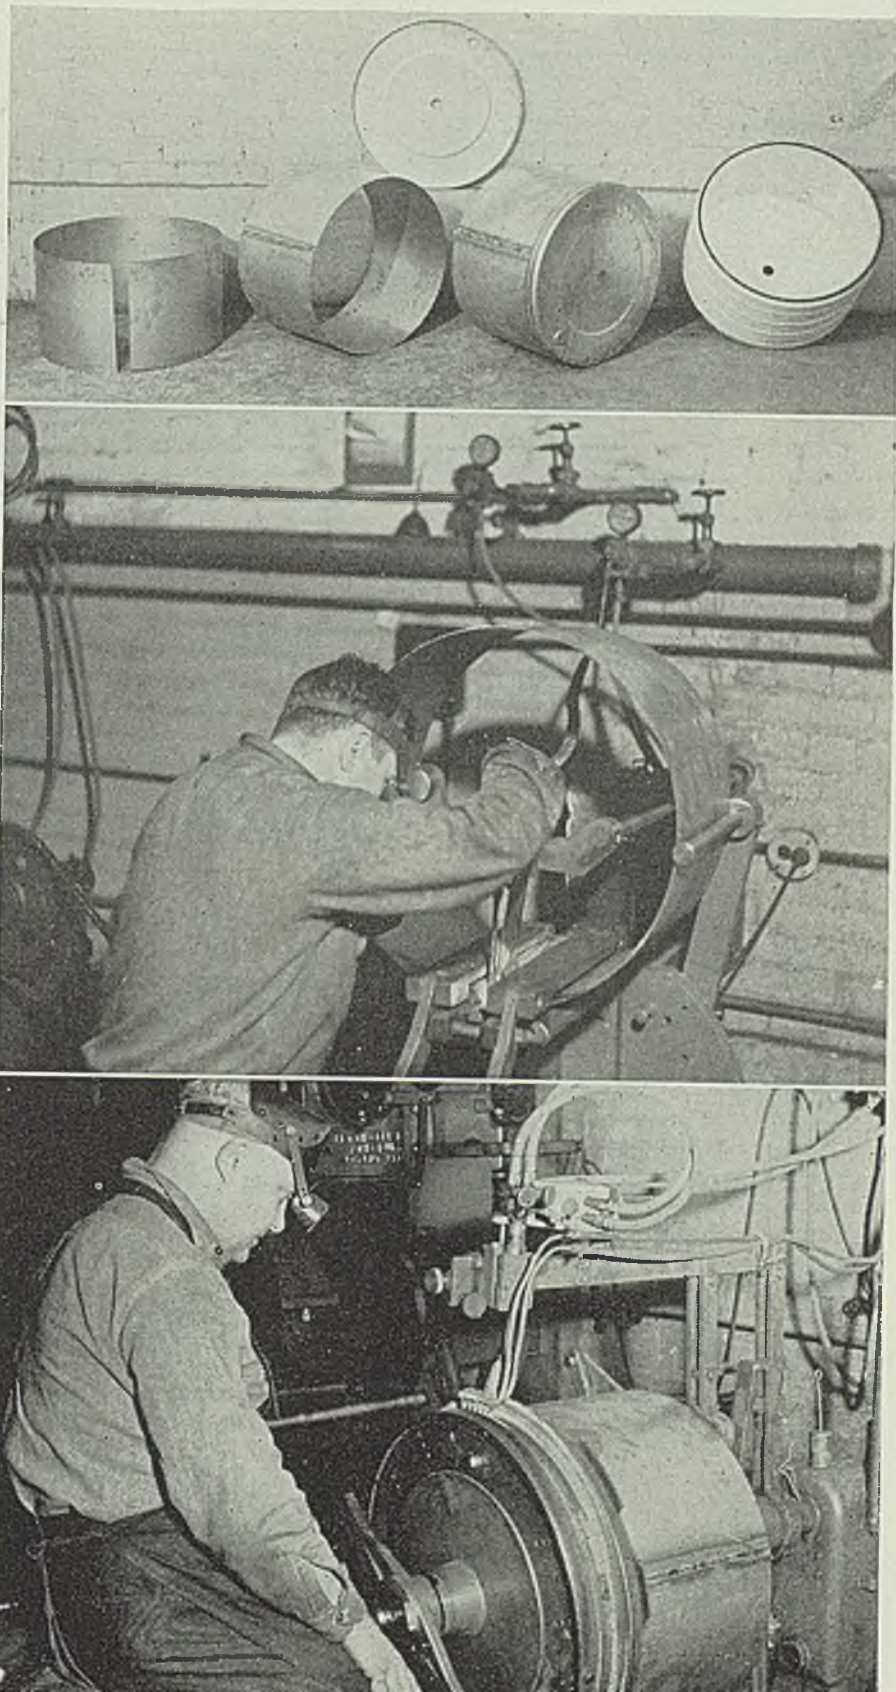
(Top)—Tub parts in various stages of completion. Fig. 2. (Center)—Equipment used to weld automatically the longitudinal seam in the sidewall sections. Operator merely adjusts torch flames. Fig. 3. (Bottom)—Heavy fixture turns work under multiple tip torch to make circular seam without assistance from operator who watches seam to be sure torch is adjusted and working properly
